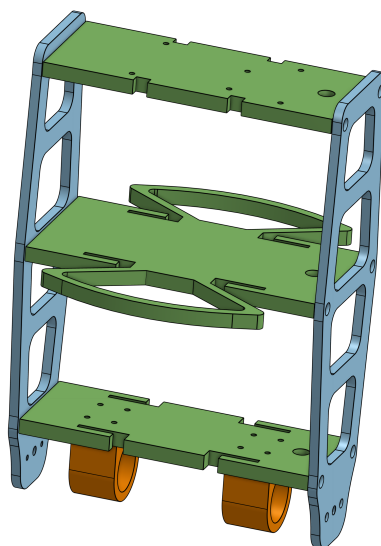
Assembled self-balancing robot in Onshape (no wheels)
